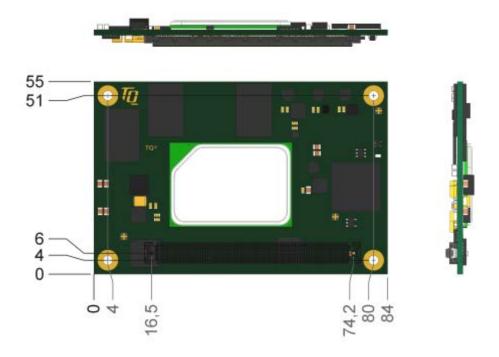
Three-sided drawing of the TQMxE40M (dimensions in mm)
